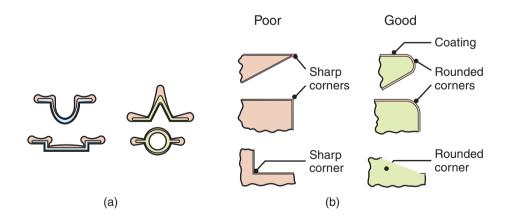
(a) Schematic illustration of nonuniform coatings (exaggerated) in electroplated parts. (b) Design guidelines for electroplating. Note that sharp external and internal corners should be avoided for uniform plating thickness.
